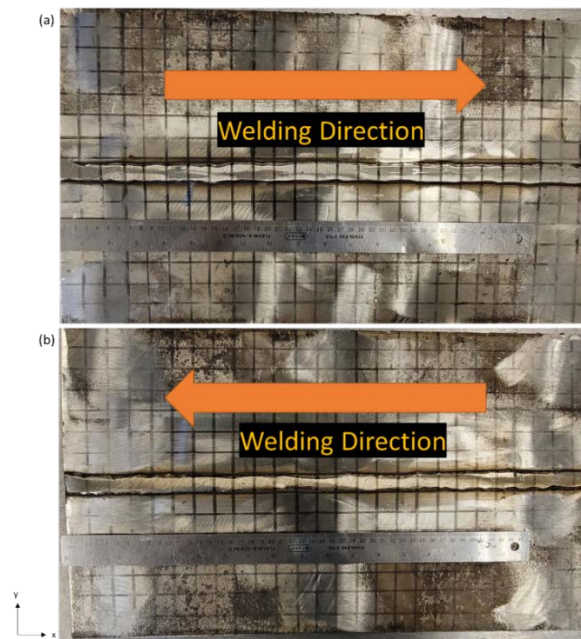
(a) 304H/Ni201 and (b) 304H/C22 explosion clad plates face side with the welding direction and XY axes marked out
